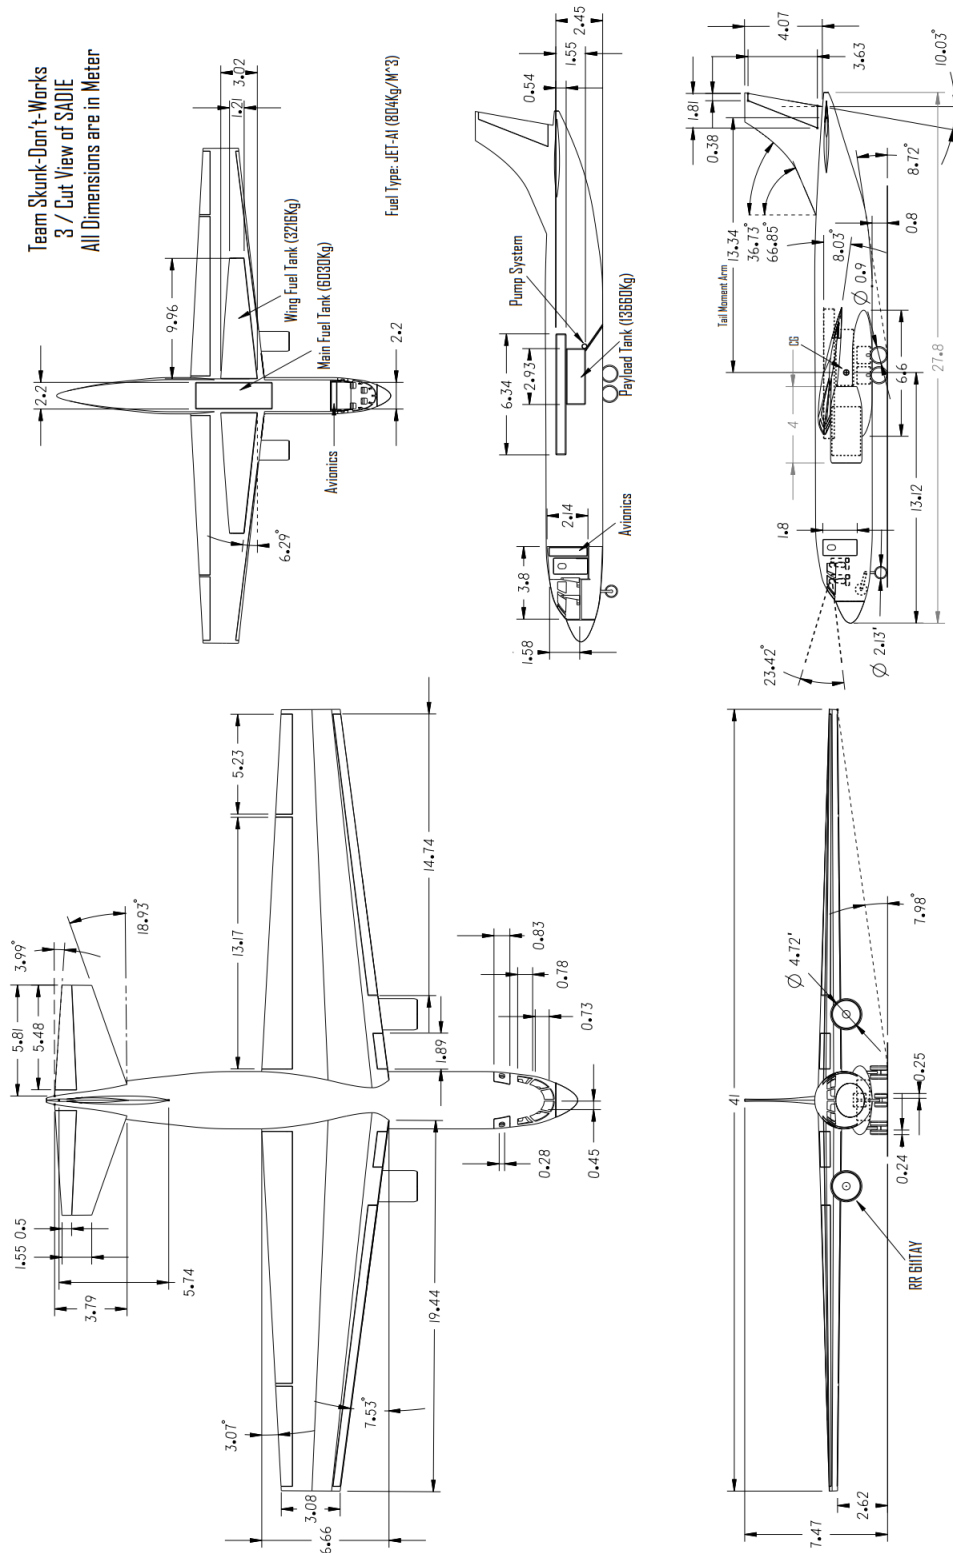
Final 3-view engineering drawing of SADIE-65.
